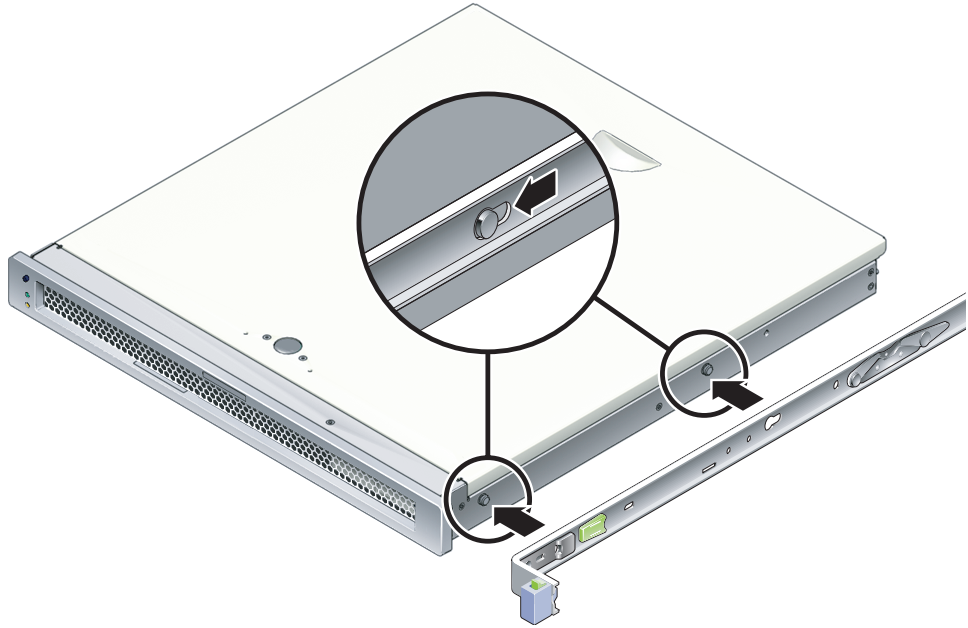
Attaching a Mounting Bracket to the Chassis
